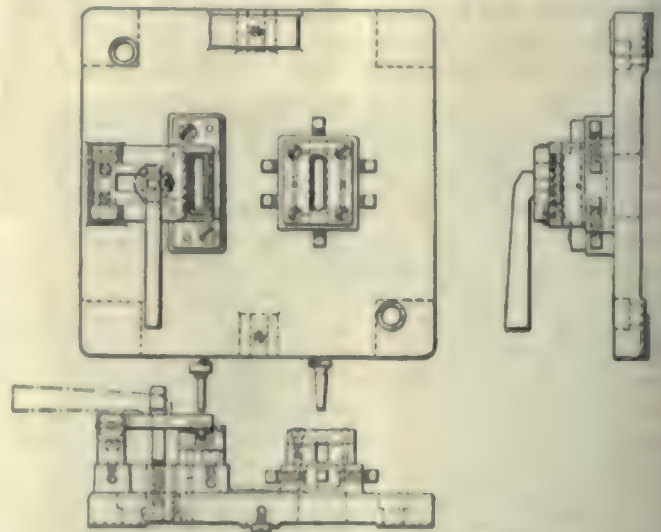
TYPICAL DRAWING OF A FIXTURE
